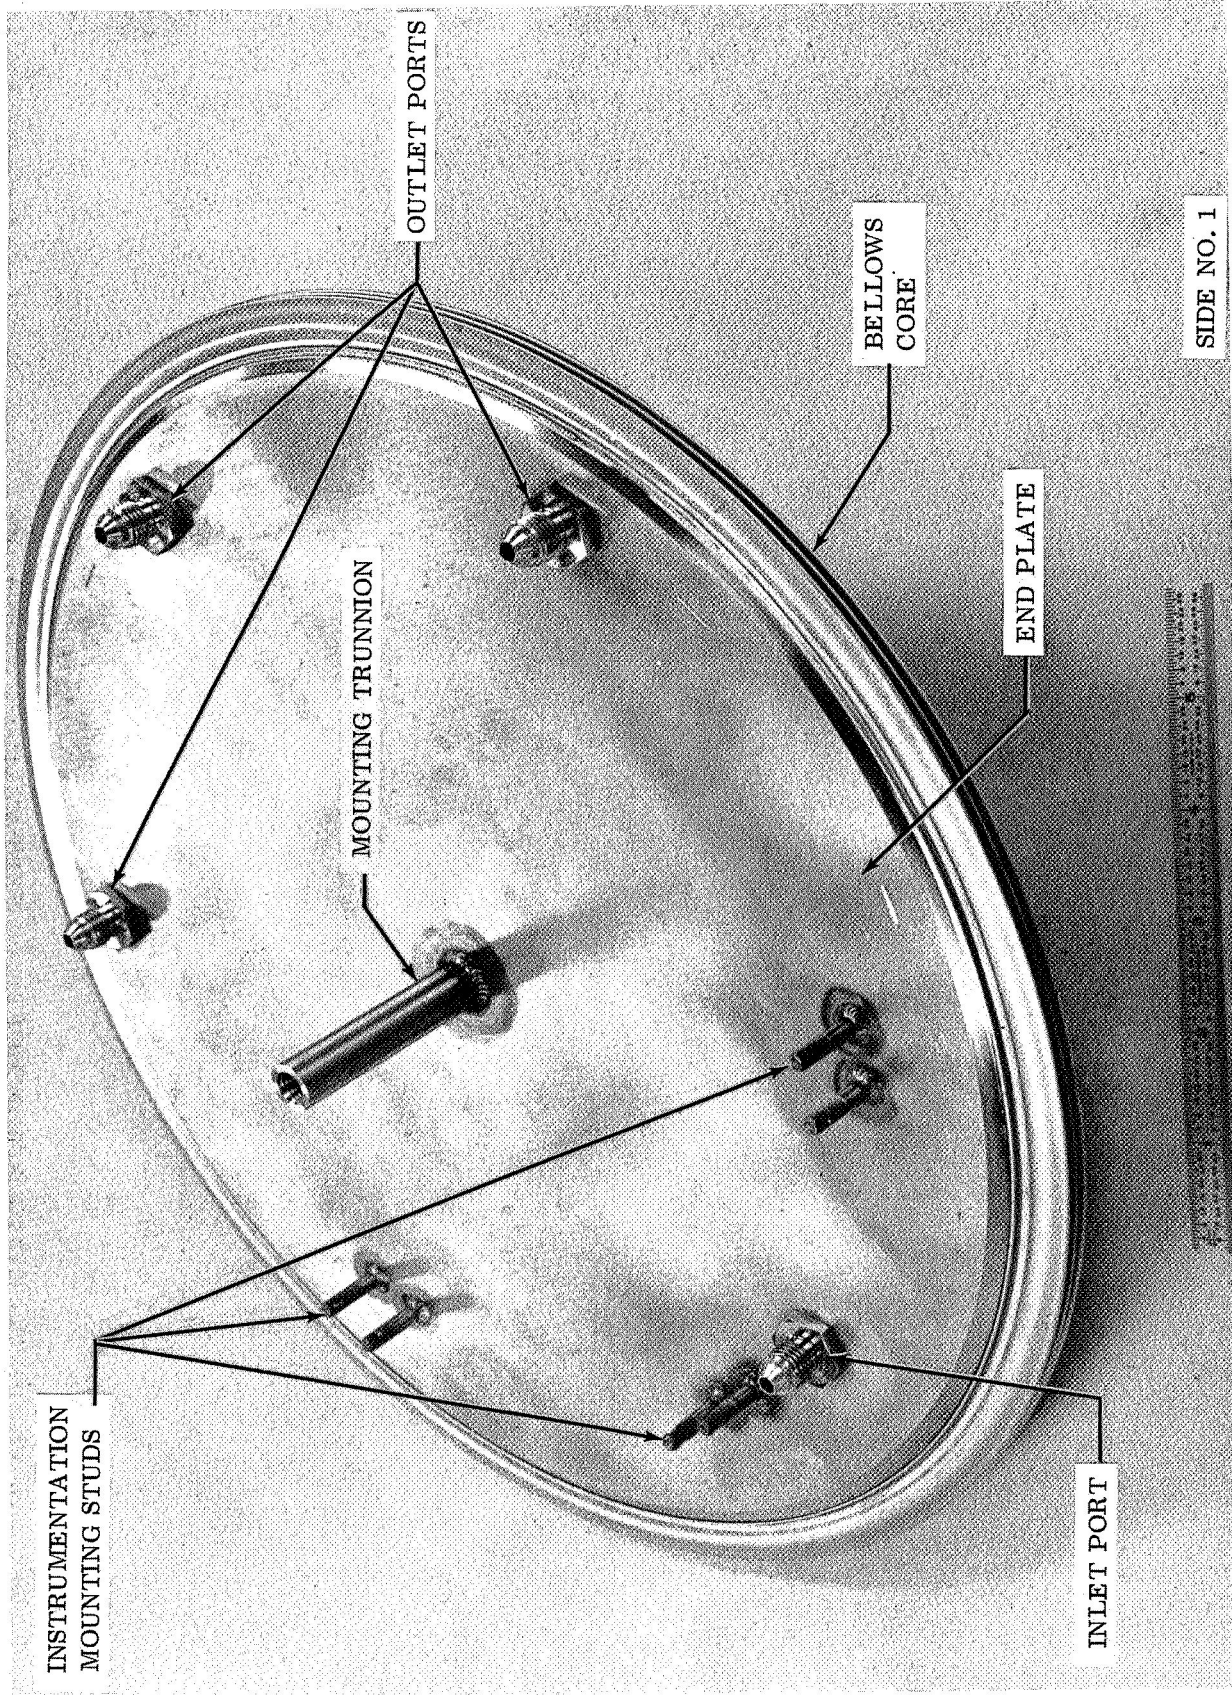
PORT SIDE BELLOWS TEST SPECIMEN ASSEMBLY
